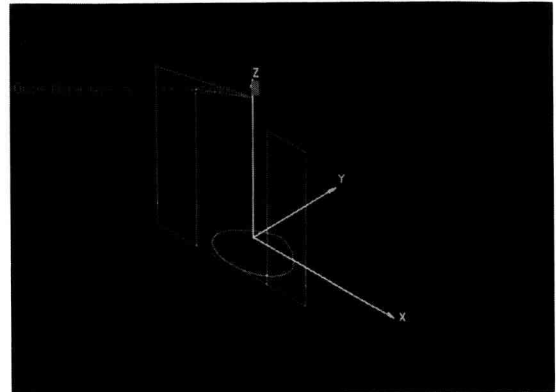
(b) Display of cutter path for plate cam cutting drawn by NC simulator
